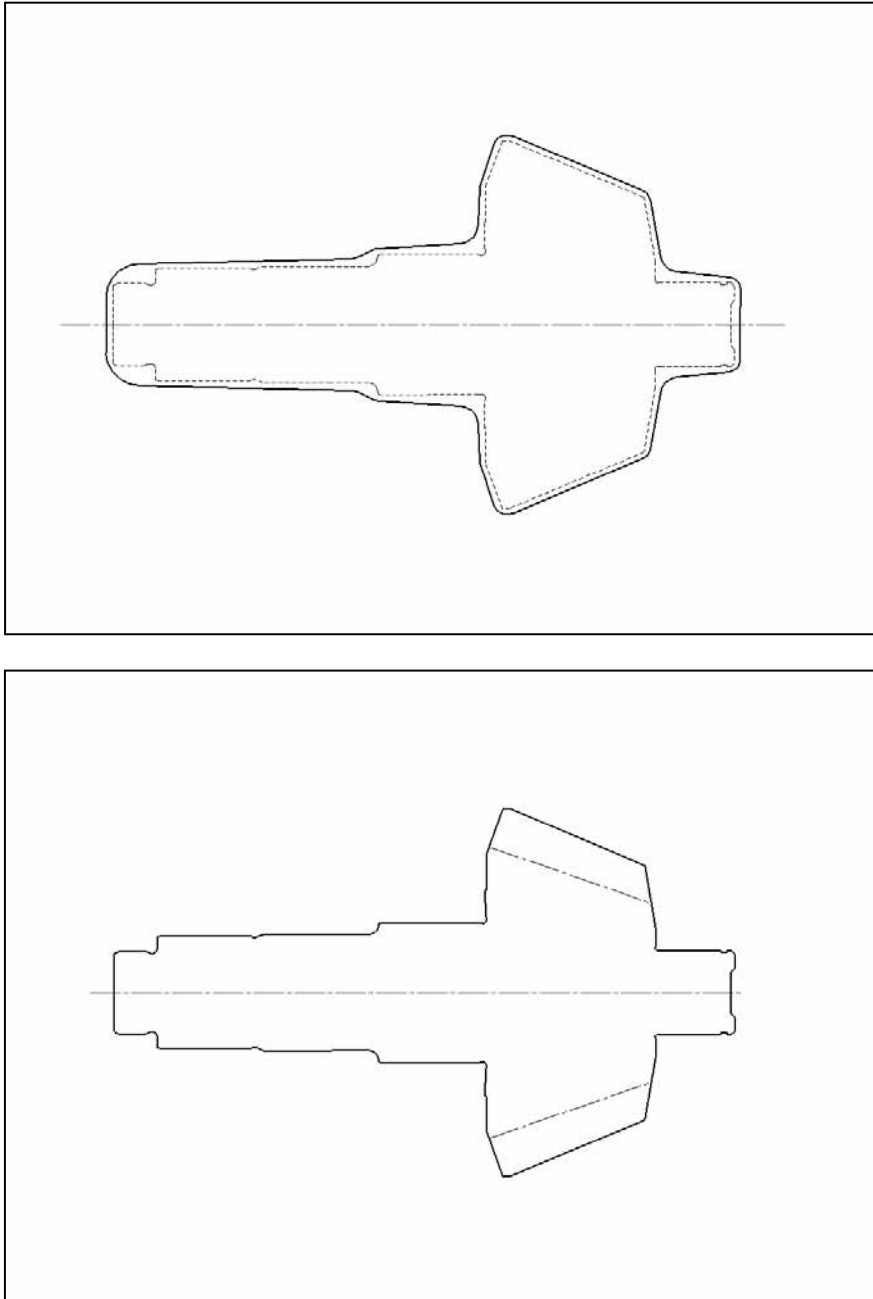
Schematic views of pinion blank (on top) and finished pinion (at the bottom). The figure symbolizes print-outs on a sheet of paper.
